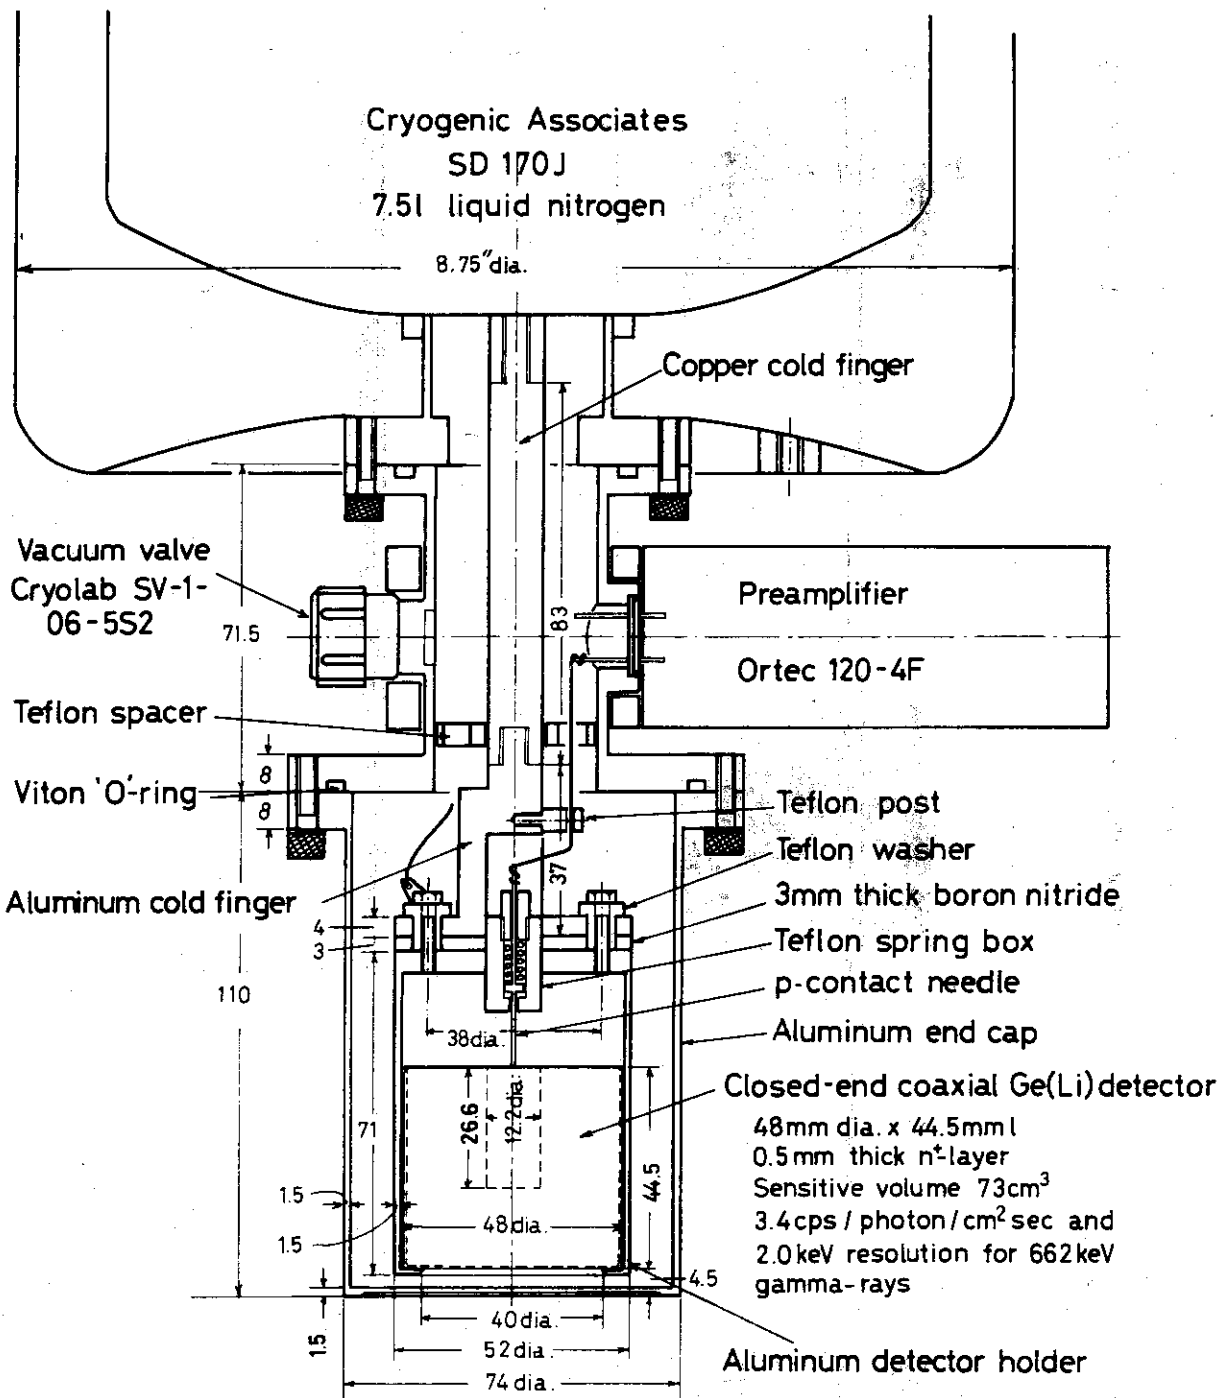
Mounting detail of 73cm³ closed-end coaxial Ge(Li) detector for in-situ gamma-ray measurement
